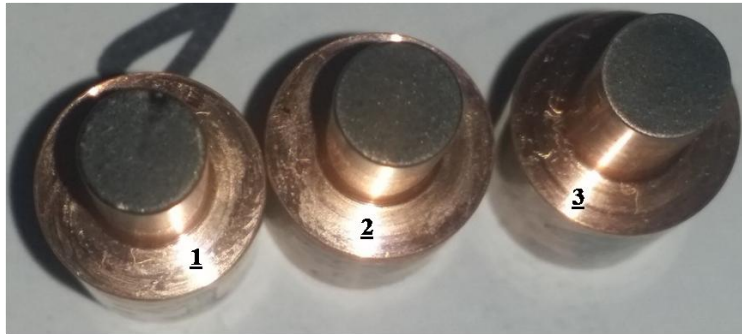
Wear of the copper electrodes after EDM: 1 – copper 1108 (rough machining), 2 – copper 1107 (semi-finish machining), 3 – copper 1106 (finish machining).
